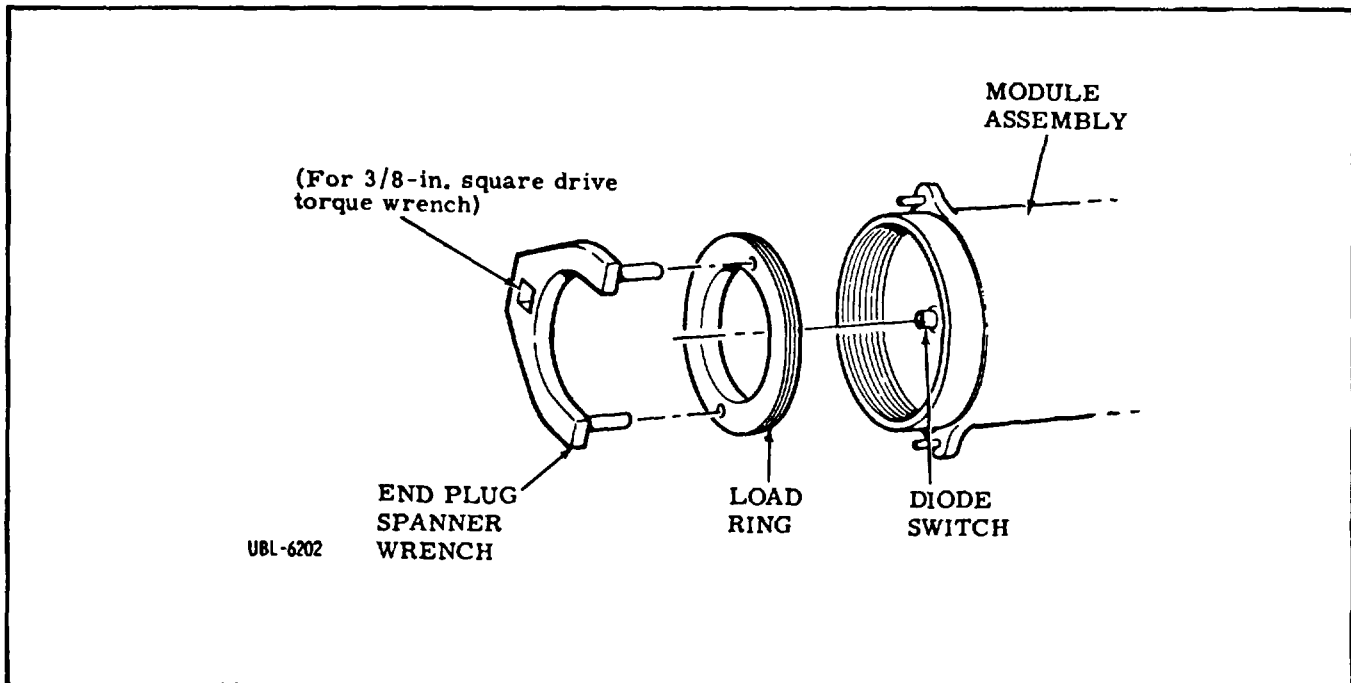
C. MA56 EXTRA Y Load Ring Installation
